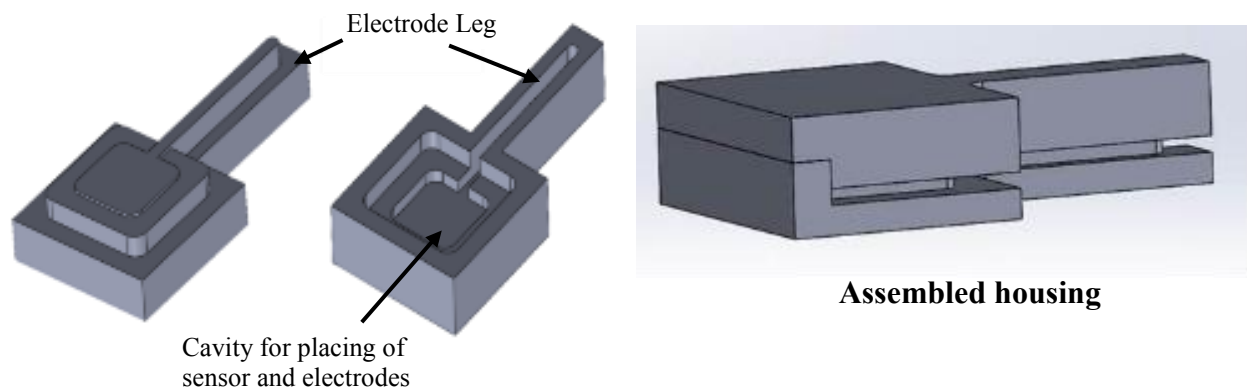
CAD design of the two parts of the sensor housing, followed by the assembled housing
